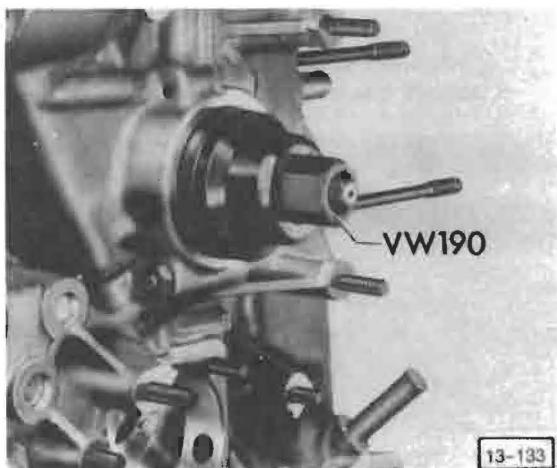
Crankshaft oil seal, cooling fan side, installing
